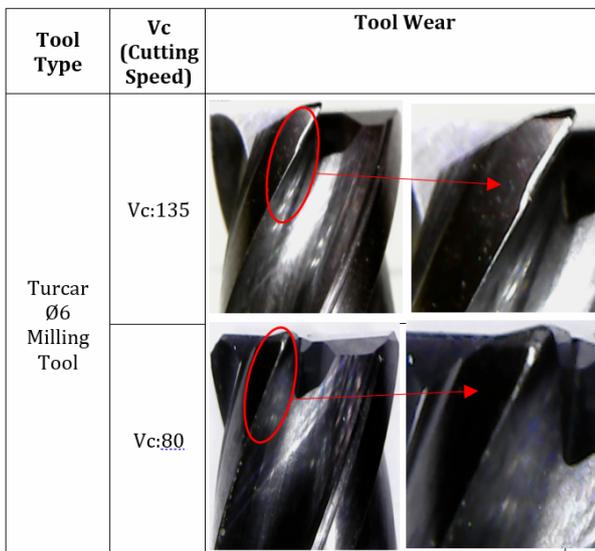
Tool wear for 45min. machining of Ø6 Turcar
